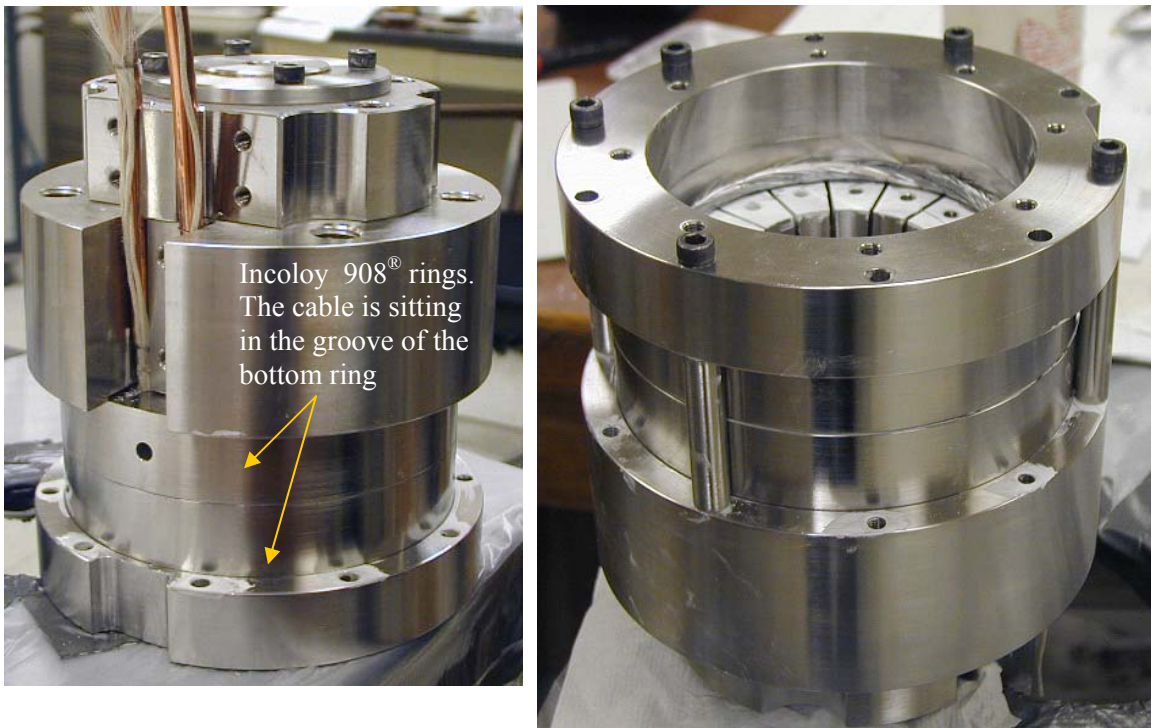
Assembly of the first sample. On the right an upside down view shows hoe the cable is enclosed in the ring.
